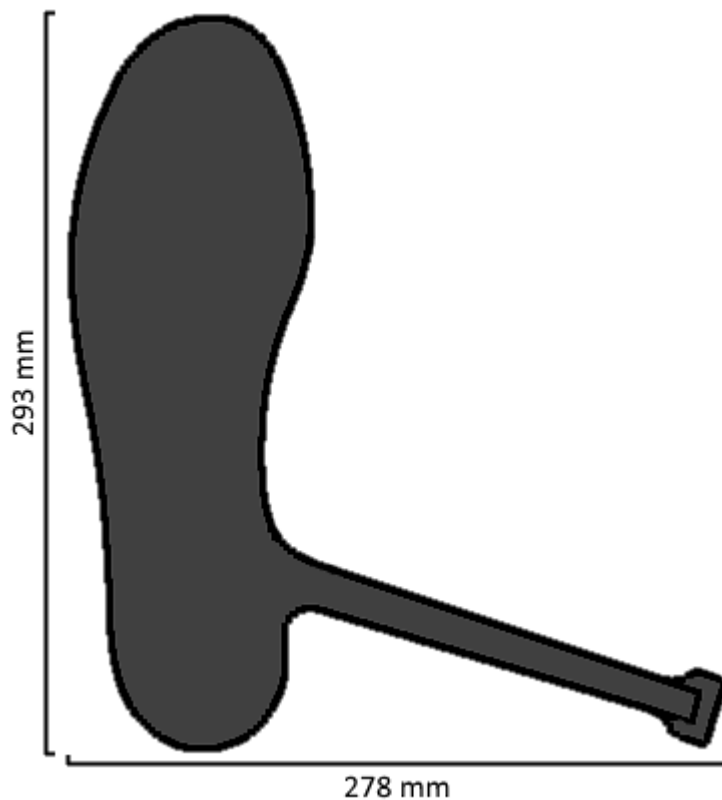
Coated insole structure. The dimensions were measured from a European shoe size 46 smart insole.
